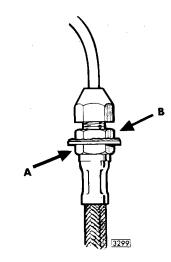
Flexible hose connection. Hold hexagon "A" with a spanner when removing or refitting locknut "B".
